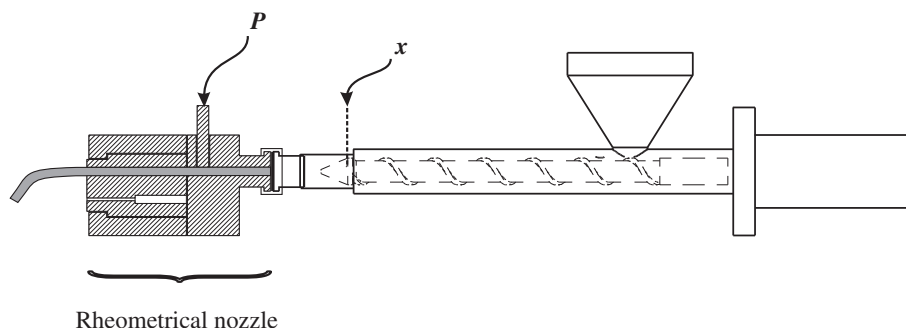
Rheometrical nozzle mounted on an injection molding machine in purging mode.
